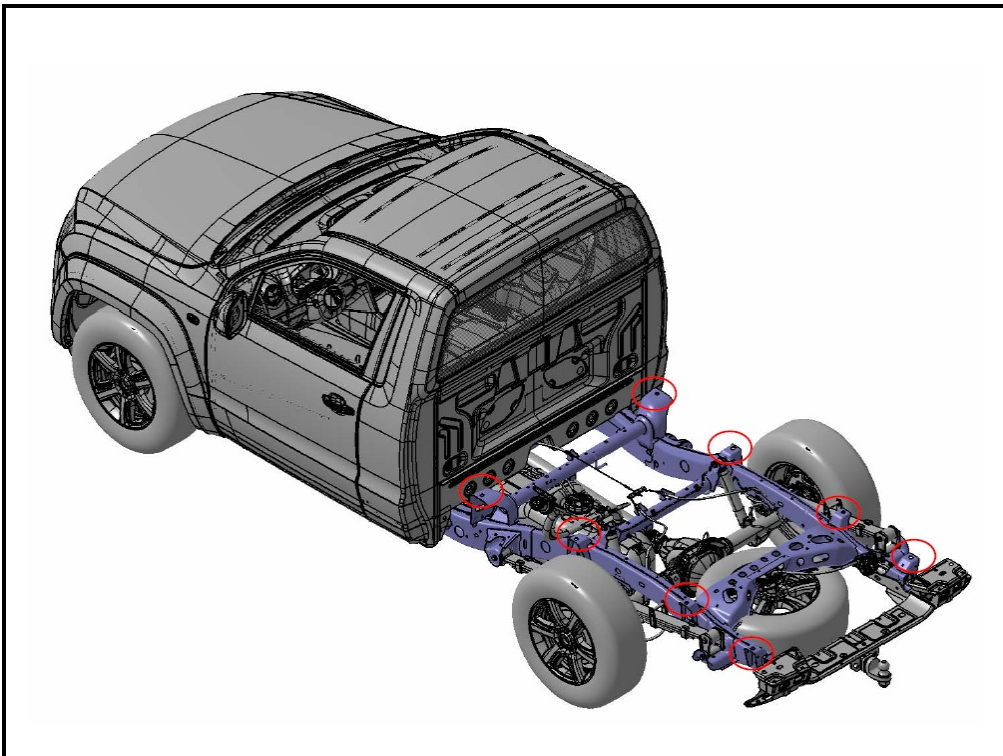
Amarok Single Cab – mounting brackets for cargo box (see red mark!)
